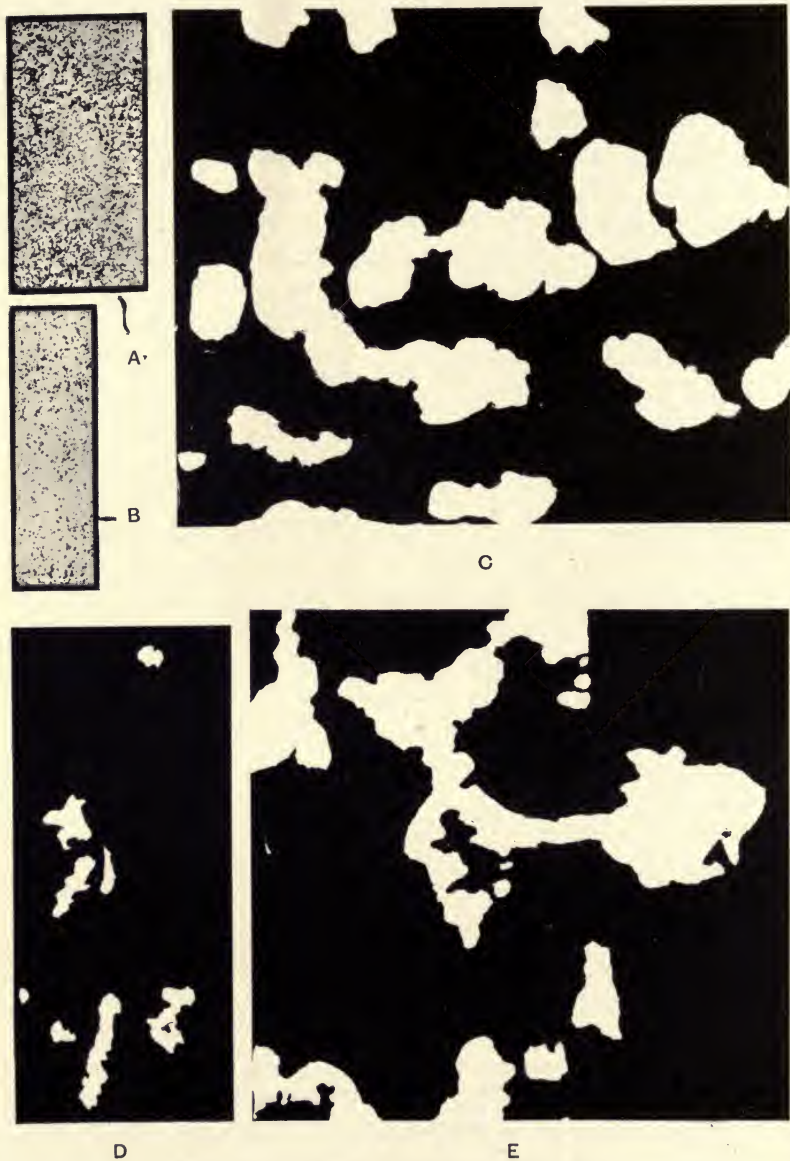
CUTTING POINTS ON WHEEL FACE
